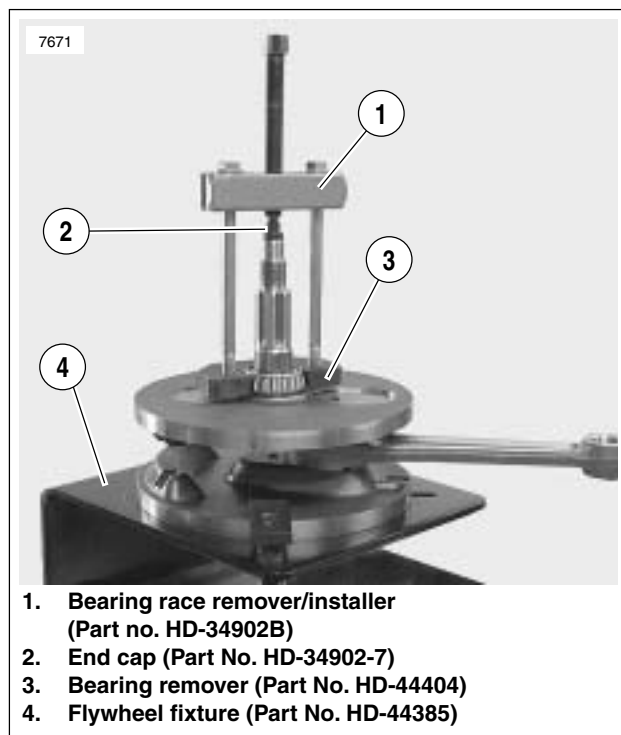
Removing Sprocket Shaft Roller Bearing
